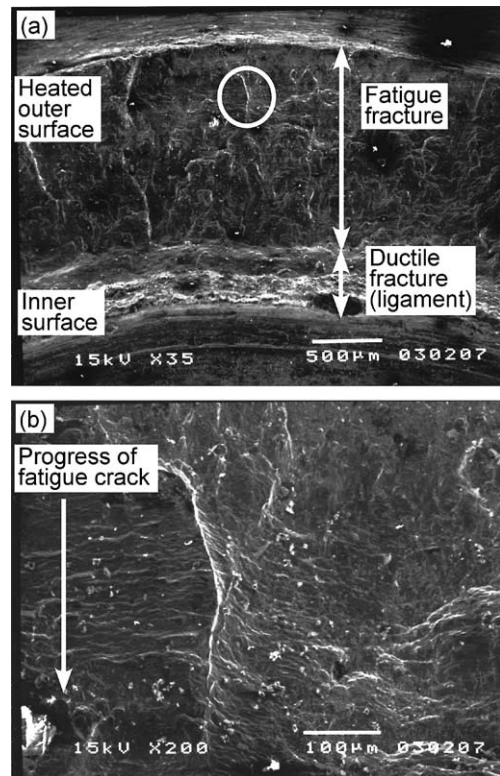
Fracture surface of the test sample after thermal cycles at 20 MW/m². (a) Whole cross-section of the fracture surface. (b) Enlargement of the circle in (a).
